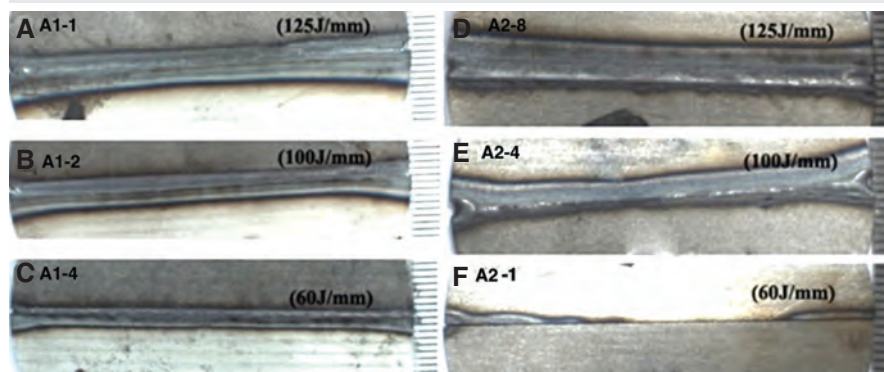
Front side weld formation for specimens with preheating. A — A1-1; B — A1-2; C — A1-4; and weld formation for specimens without preheating. D — A2-8; E — A2-4; and F — A2-1.
